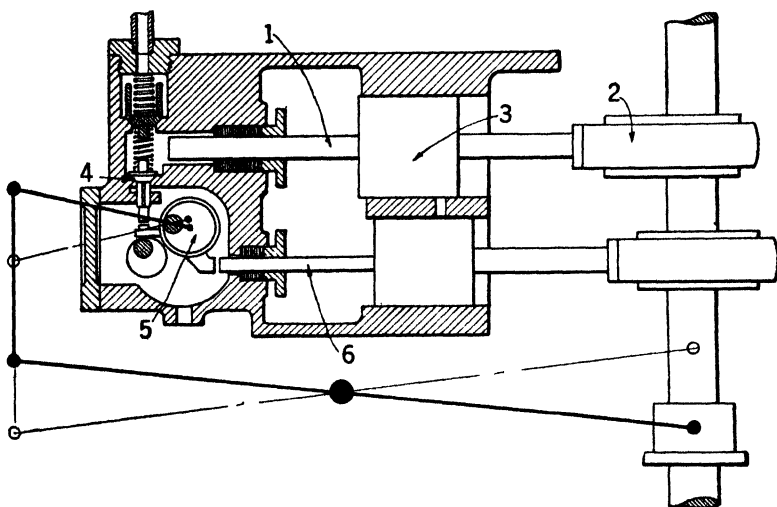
Busch-Sulzer Type "B" Fuel Pump
